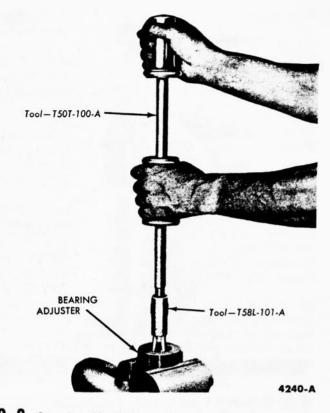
Steering Shaft Upper Bearing Cup Removal
